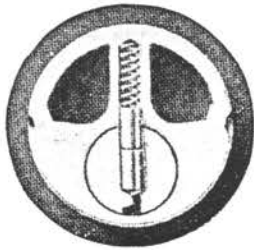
Cross-section of cylinder, pin-tumbler at bottom
